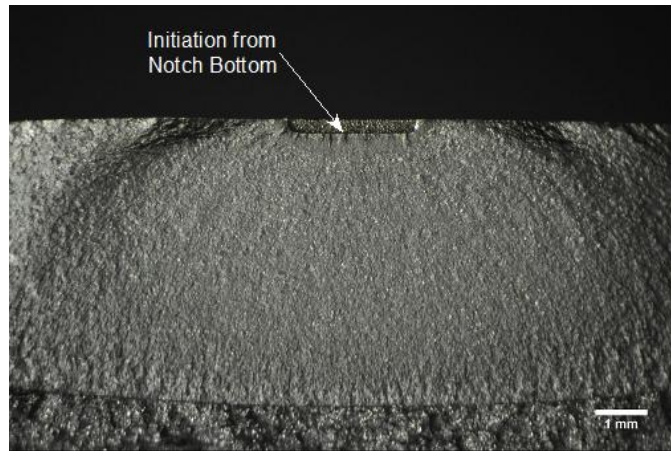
FRACTURE FACE OF LPB + 0.010 IN. NOTCH SAMPLE.
